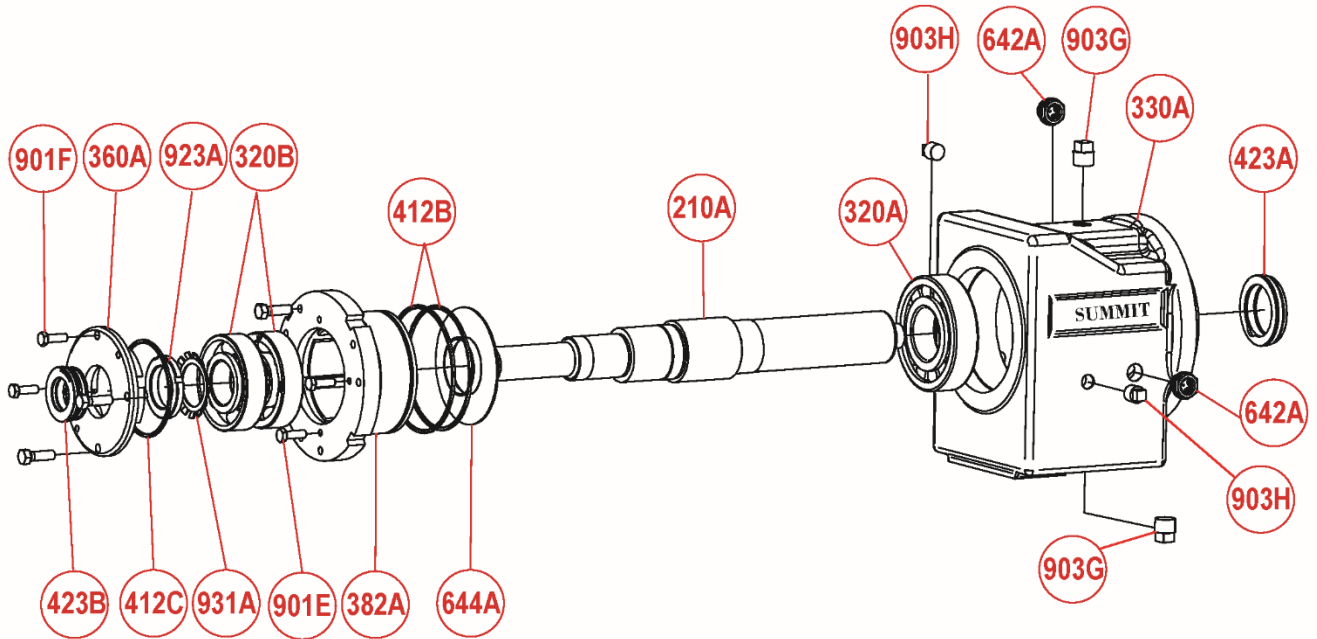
Power End Frame 2 & 3 Oil Lubricated
